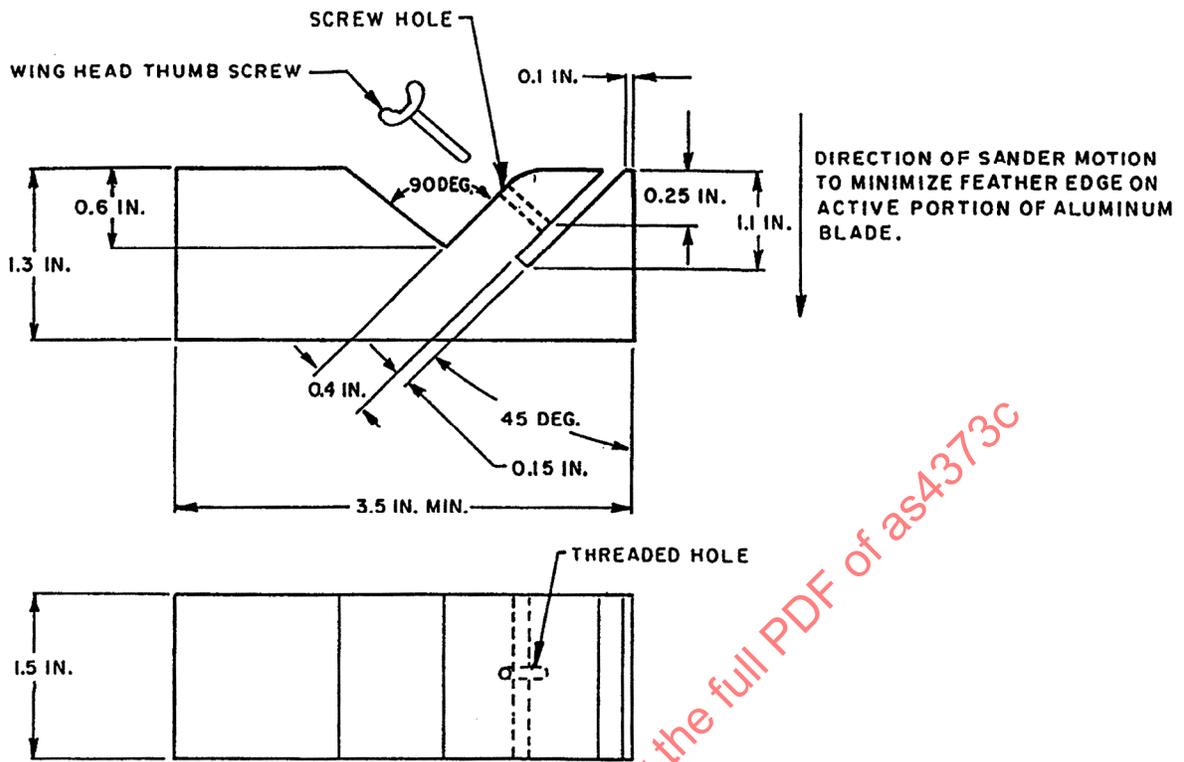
ALUMINUM BLADE SHARPENING FIXTURE
